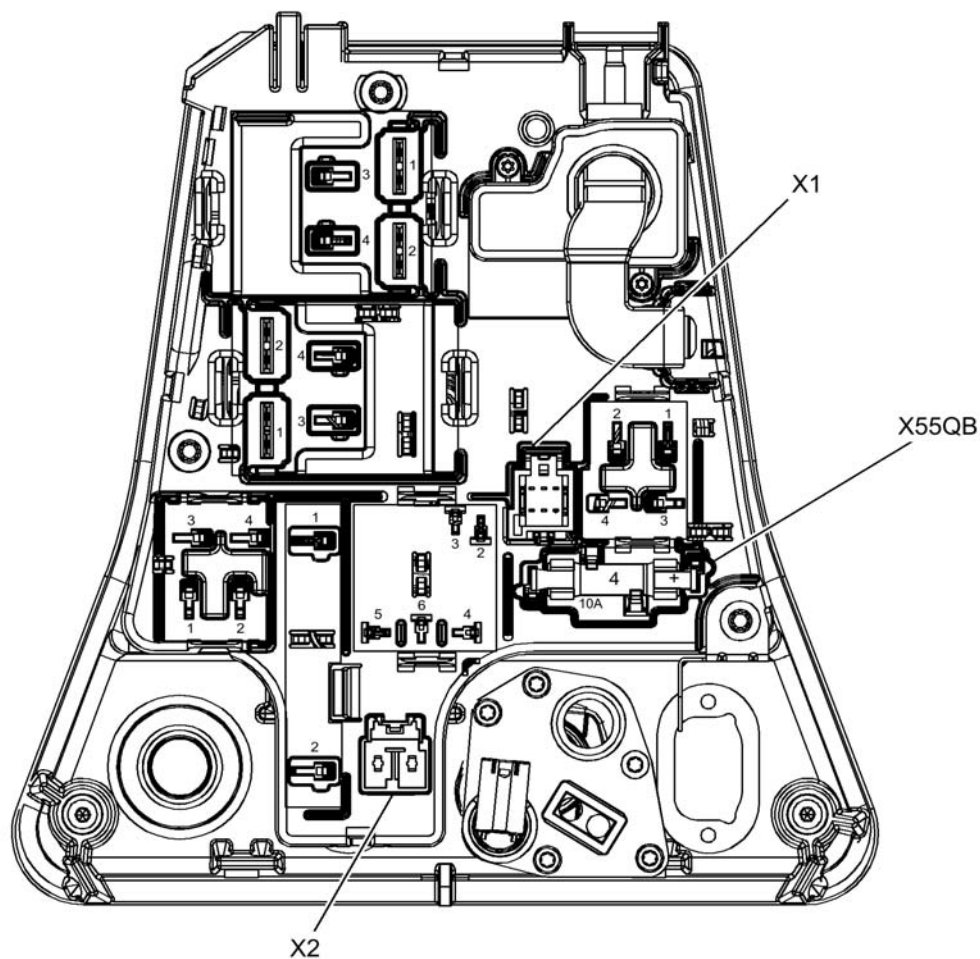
A28 Hybrid/EV Battery Contactor Assembly - Rear View
